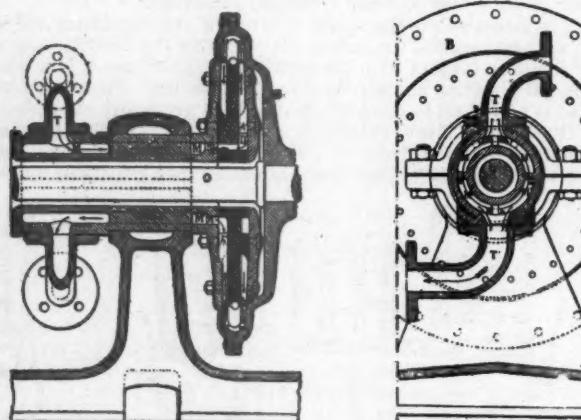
LONGITUDINAL AND CROSS-SECTIONS AT THE STEAM AND EXHAUST PIPES OF THE DUMOULIN TURBINE.
